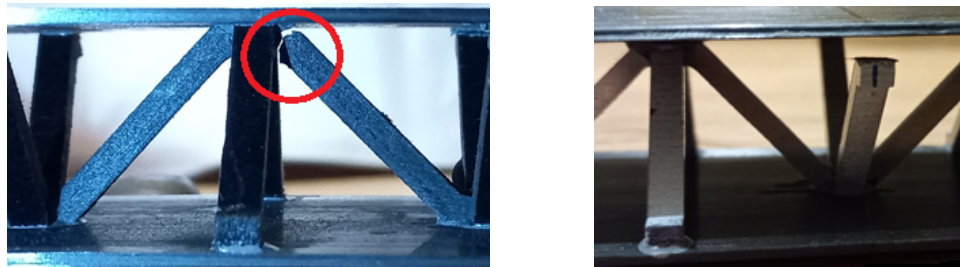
Failure modes of the sandwich beams due to bending: (left) delamination of a PA6 core; (right) CF-PA-12 truss longitudinal part collapse.
